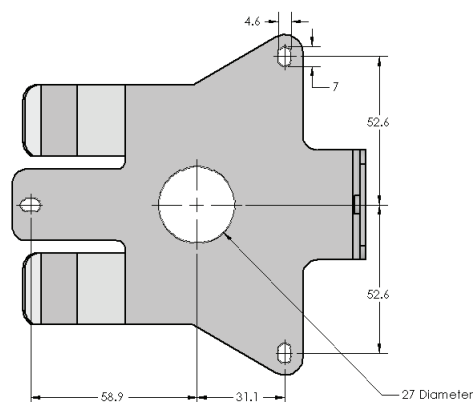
Permanent Mount Stryker® ST Spotlight – Bottom View Looking Up -Dimension in mm
